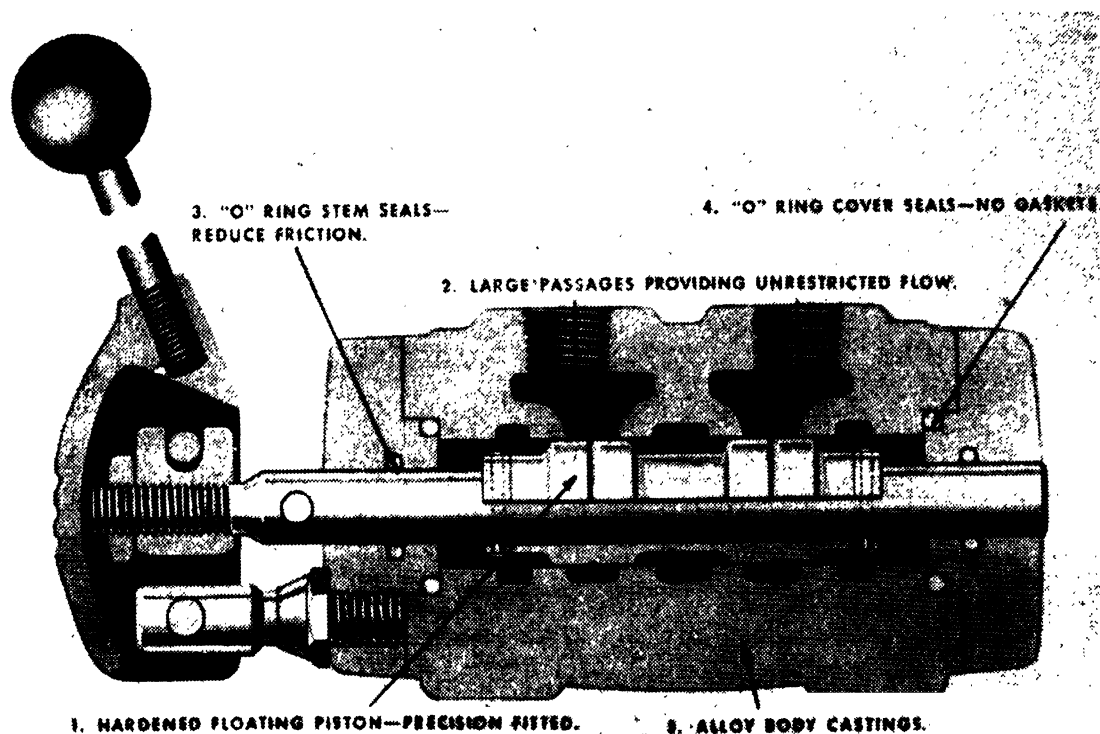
Operating valve. (Gerotor May Corp., Baltimore, Md.)
